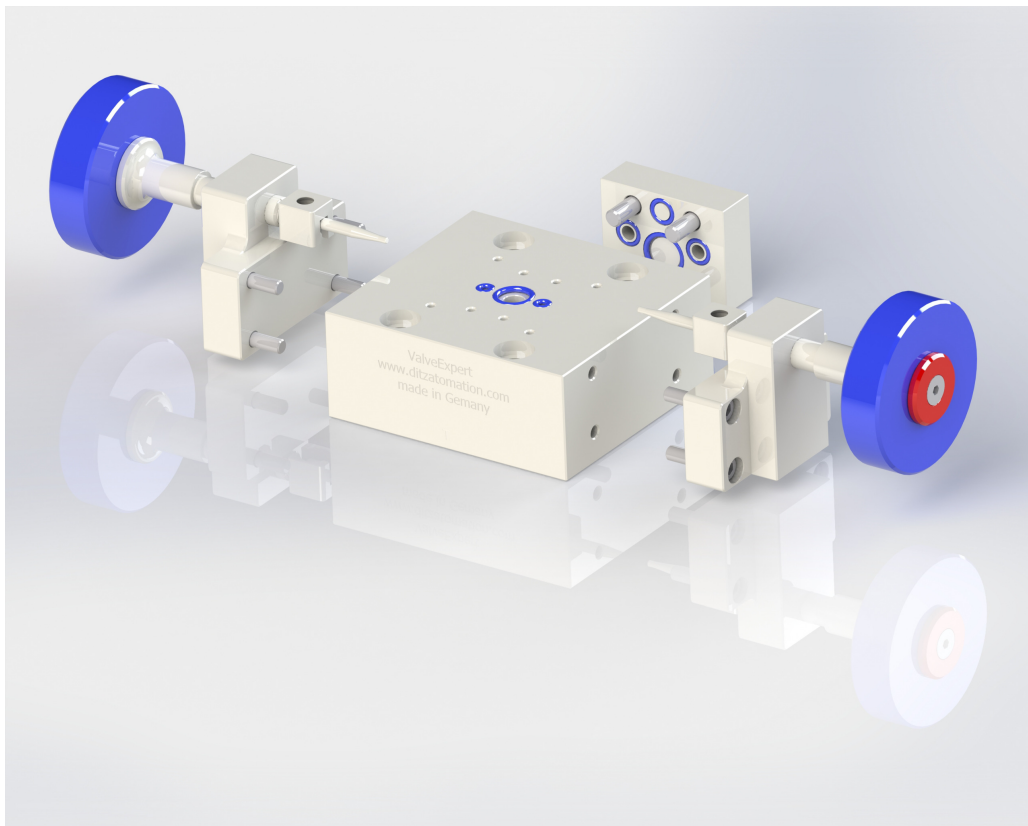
Nozzle-Pushing Adjustment Device ValveExpert VX-NPAD-002
